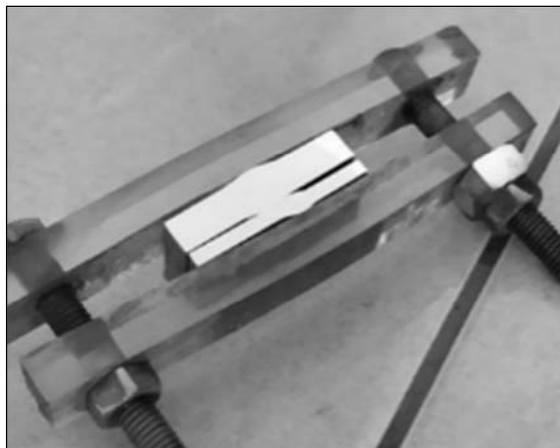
Samples for macrostructure testing for both welded plates
